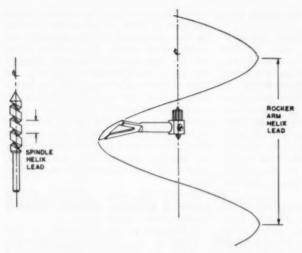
The amplification of motion produced in transferring displacement from the rocker arm to the spindle is determined as the ratio of rocker arm helix lead to spindle helix lead.
